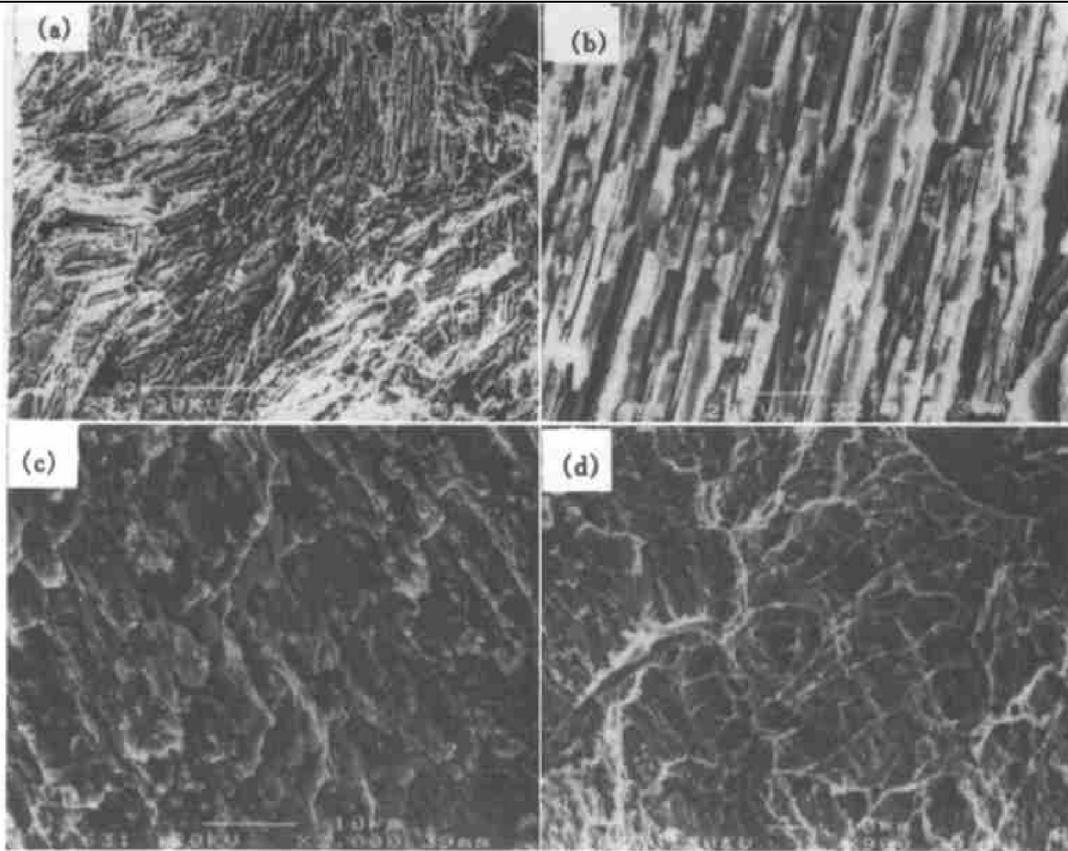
Fractographs of tensile specimen of Ti-46.5Al-2.5V-1Cr alloy
